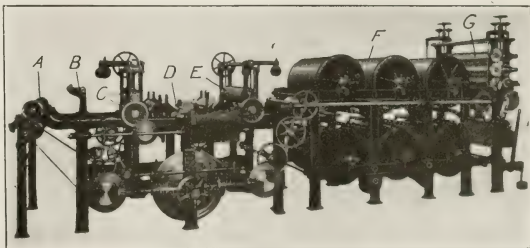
MACHINE FOR FINISHING ELASTIC WEBBING.
